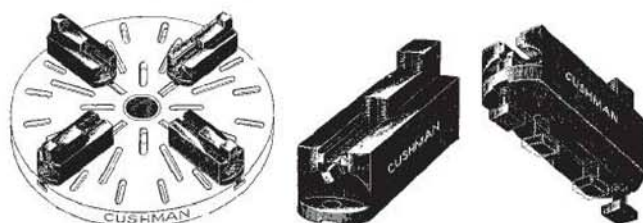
A set of four faceplate dogs with faceplate. Dogs only, in sets of four, were sold for any faceplate.
